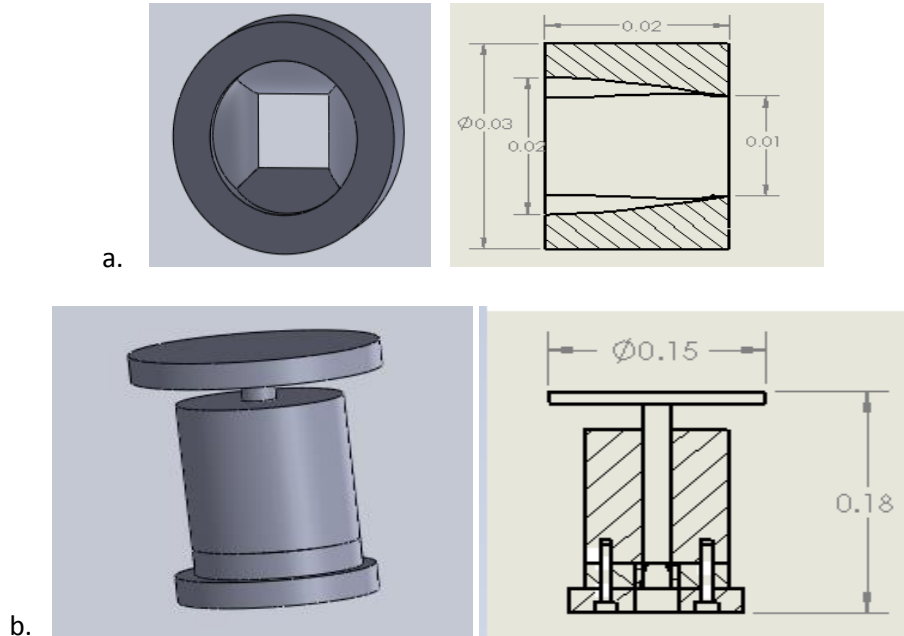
9 a) Cosine die 3D and 2D section view and b) 3D assembly and 2D sectionsl drawing
